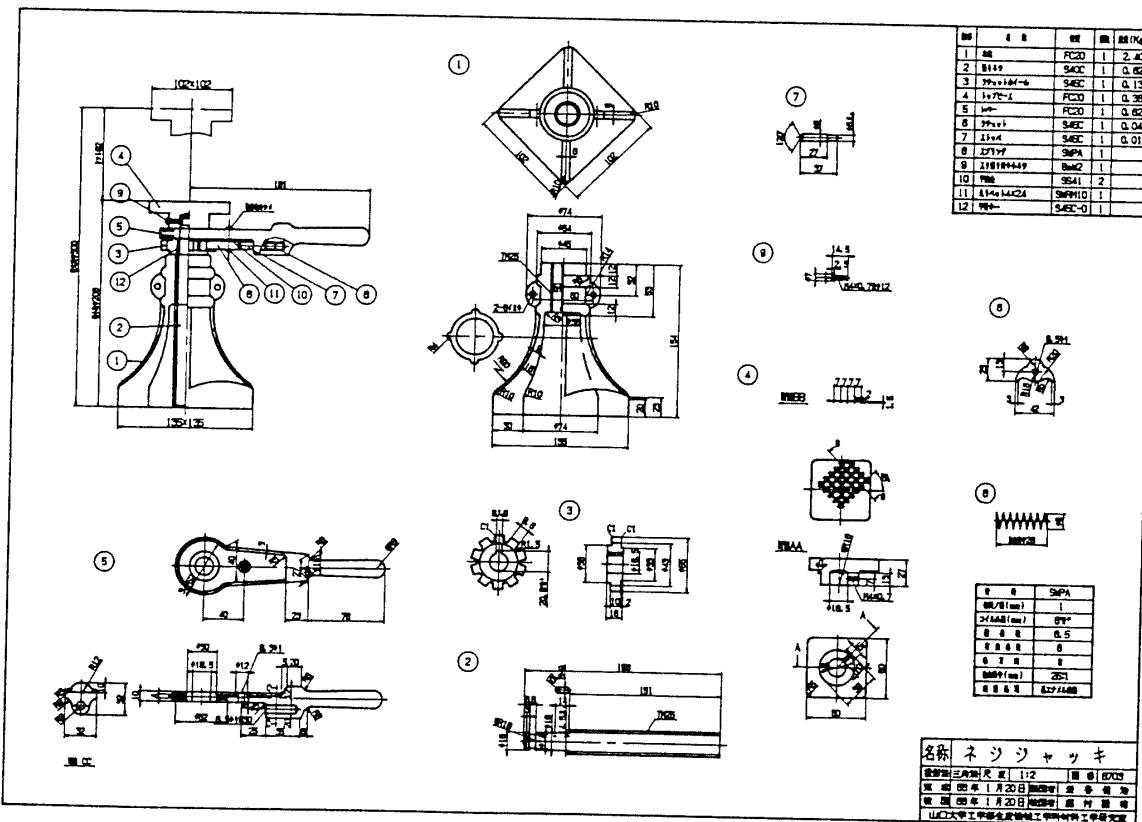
(b) CAD drafting of a screw jack (from a sketch of it).
